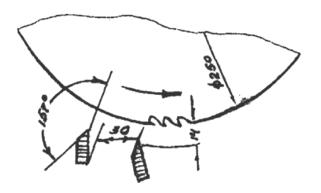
OXP – Cotton ginning section with 3 types of trapezoidal columns.
